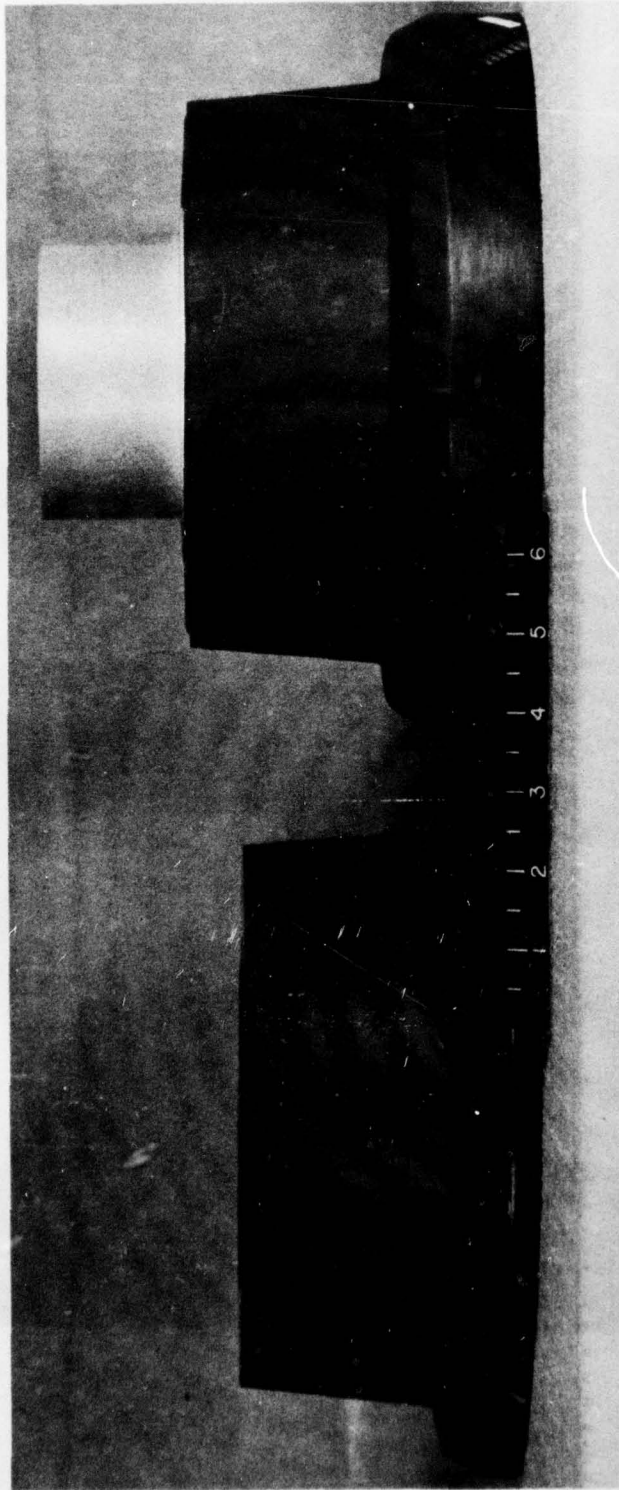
Side View - Disassembled Graphite Epoxy Wheel
